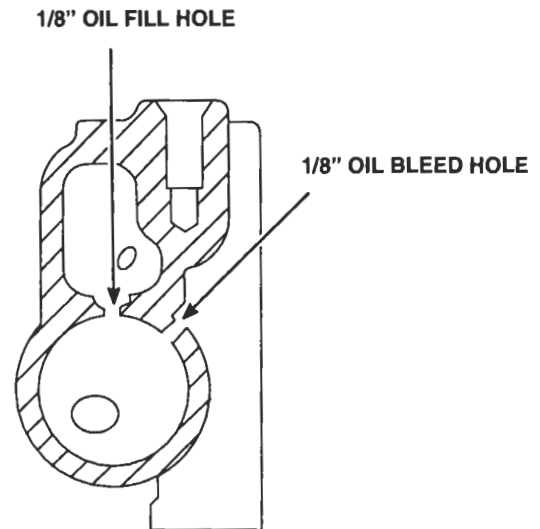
Cutaway View of Throttle Delay Cylinder Rocker Arm Shaft Bracket for Horizontal Engines
